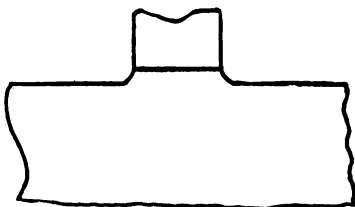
Another method of welding a tee connection on a large pipe. (This method is recommended in preference to that shown in the preceding illustration.)
